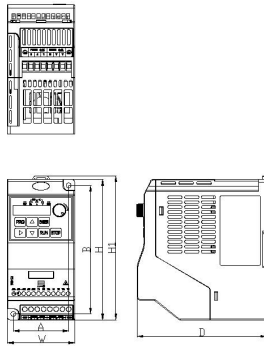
0.4kW~2.2kW Outline dimension and installation dimension
